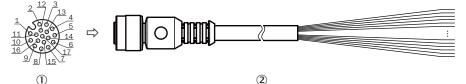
Adapter cable, e.g. part no. 2070425 (3 m)
